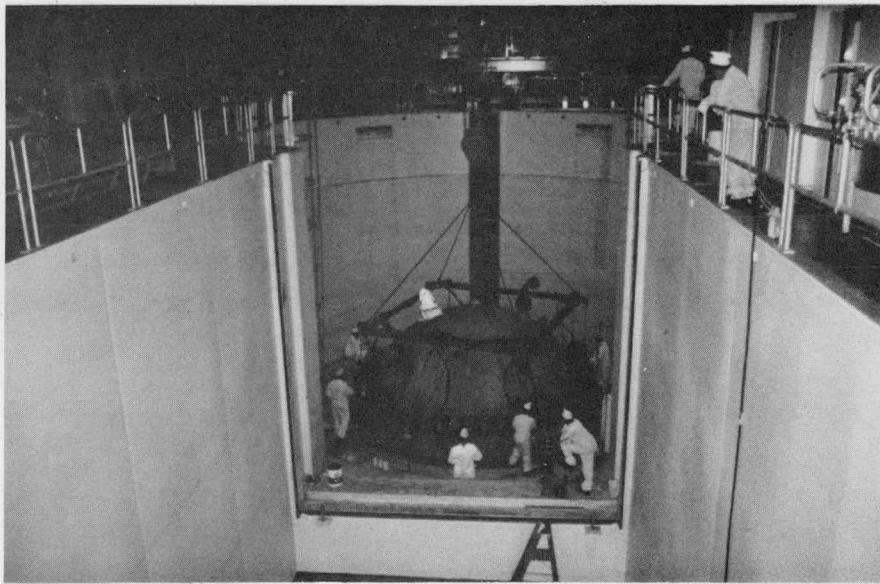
RPV Head Nut Removal Tools on Carousel Assembly (Browns Ferry)
